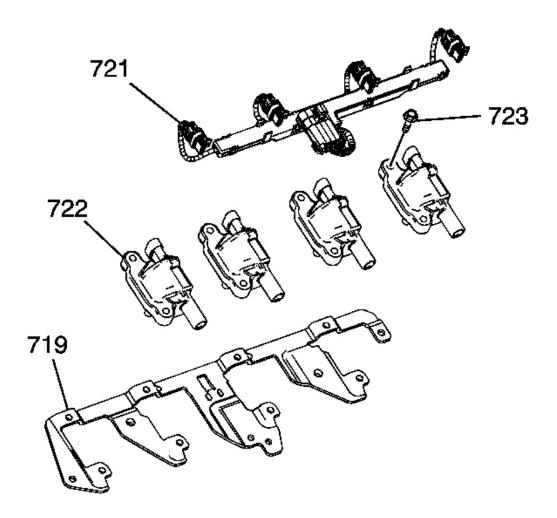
View Of Bracket, Bolts, Coils & Wire Harness Courtesy of GENERAL MOTORS CORP.
